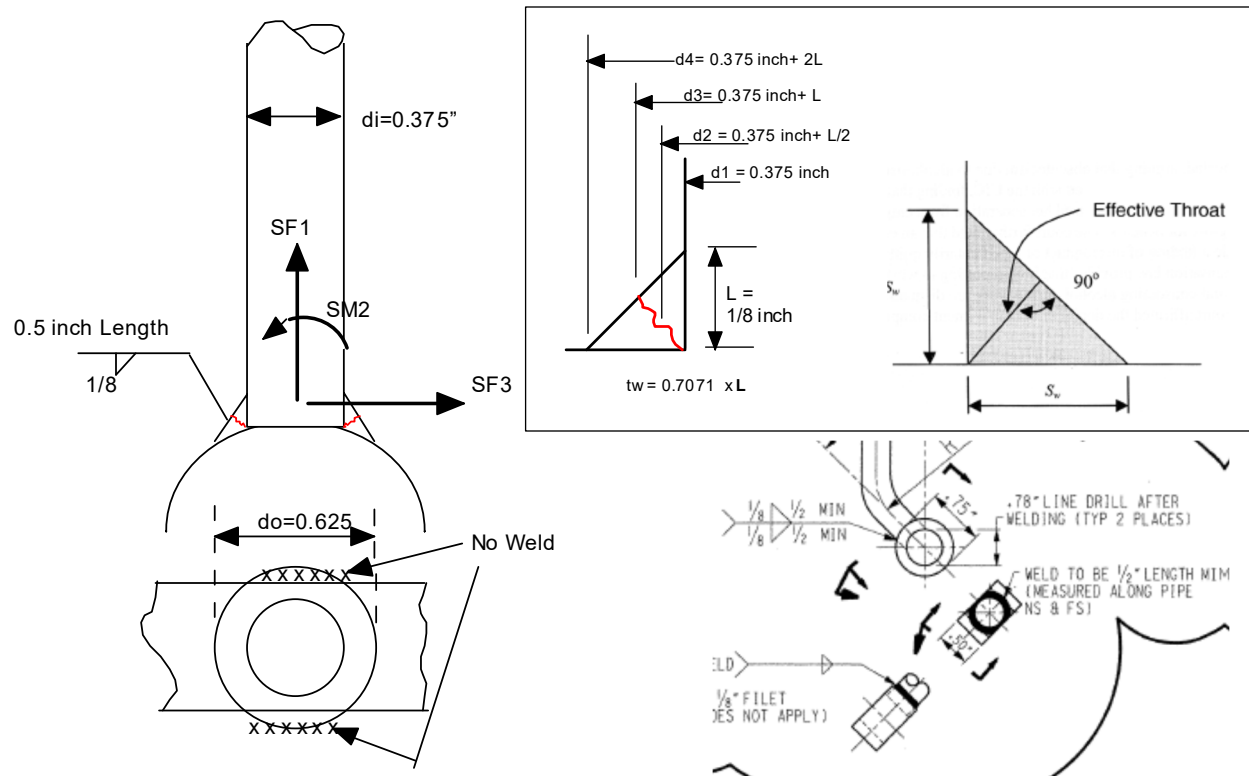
Weld Detail for Lift Bar, Inner Carrier
